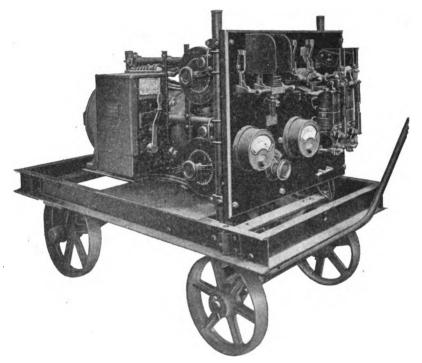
Portable Welding Outfit Courtesy of General Electric Company
